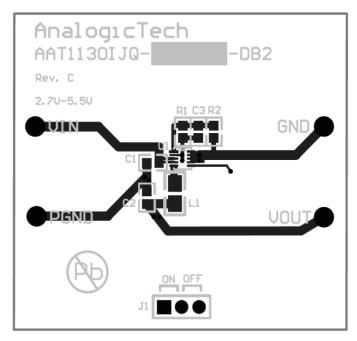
AAT1130 Evaluation Board Top Side PCB Layout.
